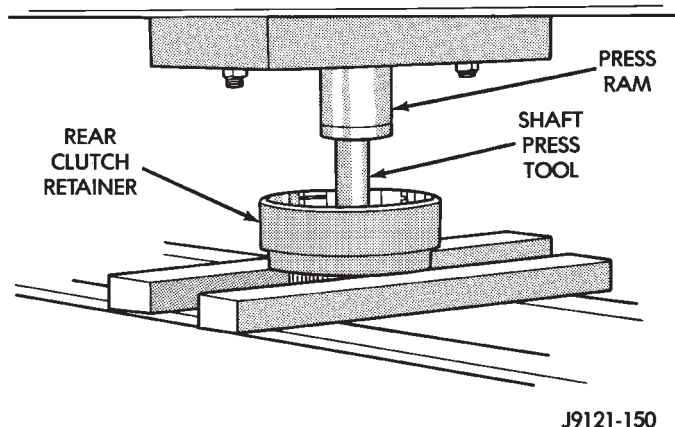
Pressing Input Shaft Out Of Rear Clutch Retainer
